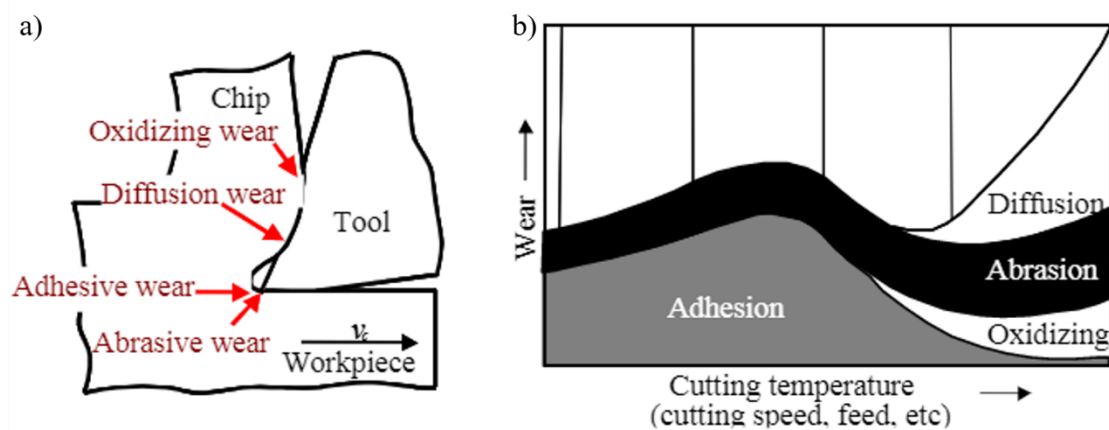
Main wear mechanisms of inserts during the machining process [40].
